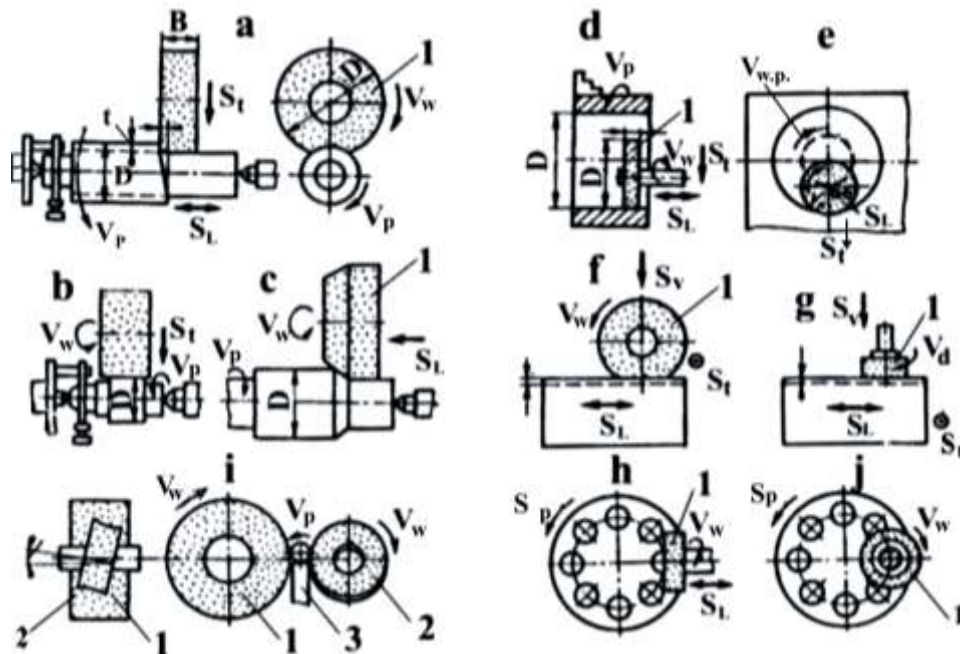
Basic grinding operations: a, b, c, i – grinding of external cylindrical and tapered surfaces; d, e – grinding of internal surfaces; f, g, h, j – grinding of flat surfaces; 1, 2 – abrasive disks; 3 – support (blade)
